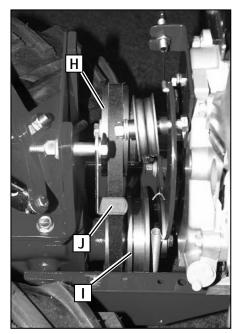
Install forward belt on transmission (lower) pulley and then on engine (upper) pulley.
